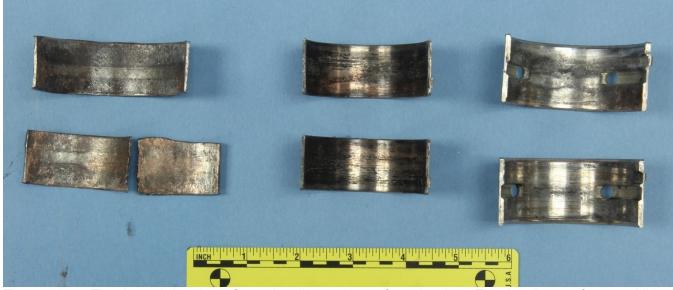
The journal bearings from the #6 position after cleaning. The bearing surfaces exhibited circumferential wear scars, plastic deformation, and spalling.
